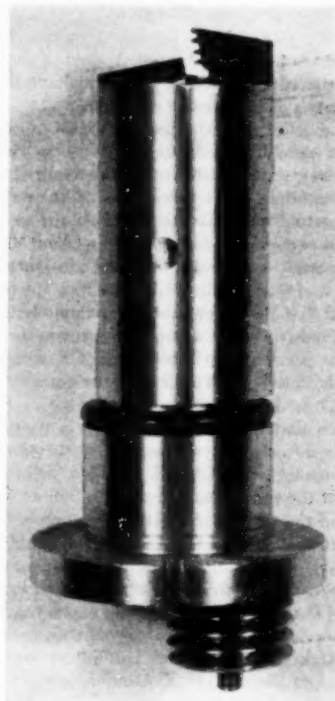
TOOLHOLDER WITH TOOL BIT IN POSITION
